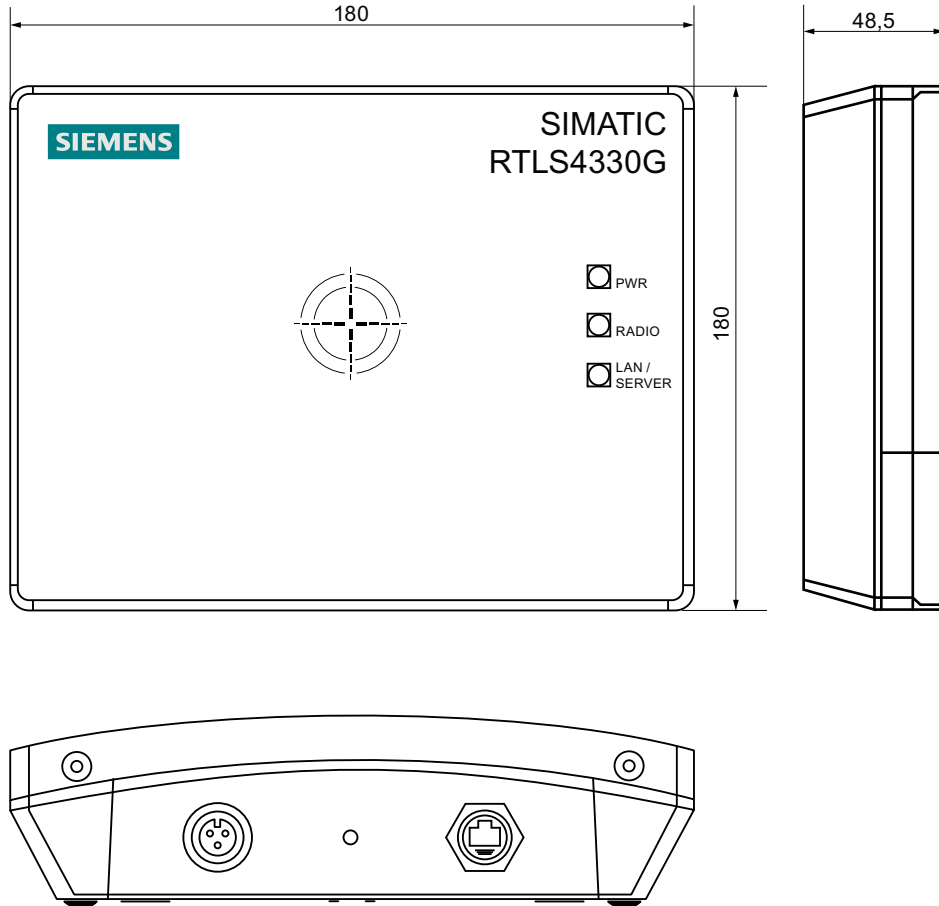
Dimension drawing SIMATIC RTLS4330G - All dimensions specified in millimeters
